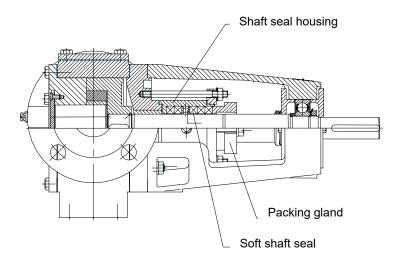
The location of the soft shaft seal, the shaft seal housing and the packing gland on the pump. The design of the shaft seal housing, does, however, depend on the individual pump application.
